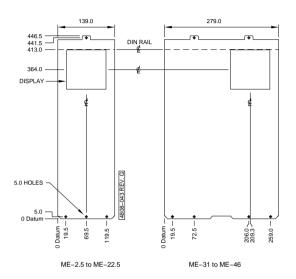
Standard Mounting Details for Elite Series (2.5A to 46A)
